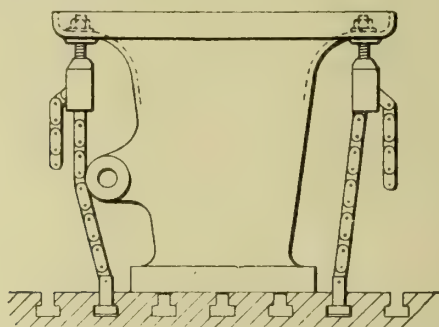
ADJUSTABLE CHAIN BOLT, TAKING THE PLACE OF A BENT BOLT. (See p. 713.)
